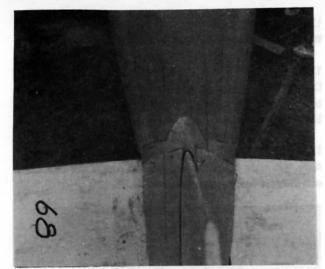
Deck foam sanded and ready for Dynel and resin.
